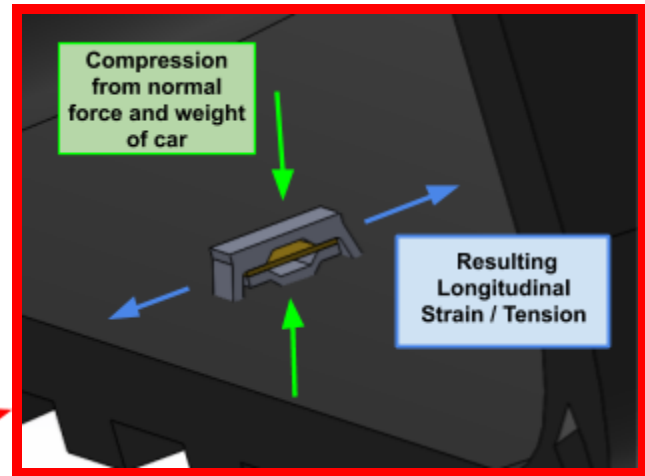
View of Forces Acting on Cymbal PEH Assembly
